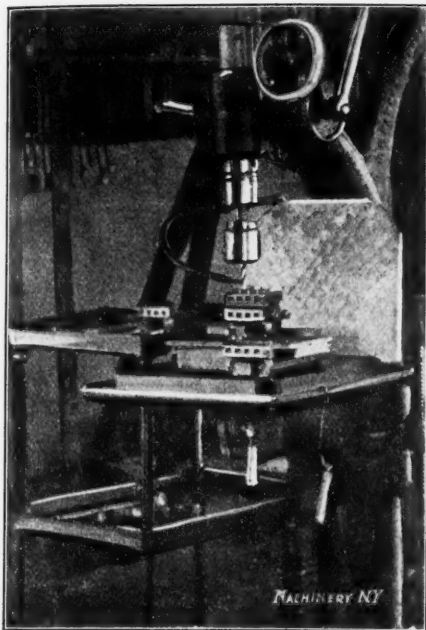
Drilling Set-screw Holes in the Gang Tool-holders
